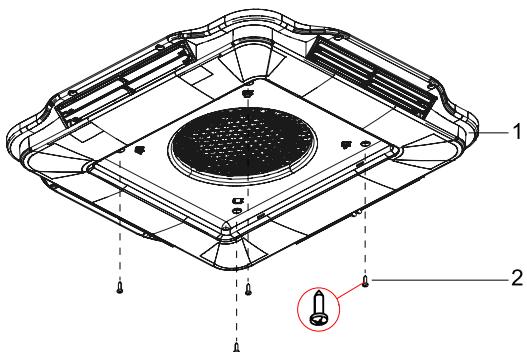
Fixing the air distributor assembly to the mounting bracket
